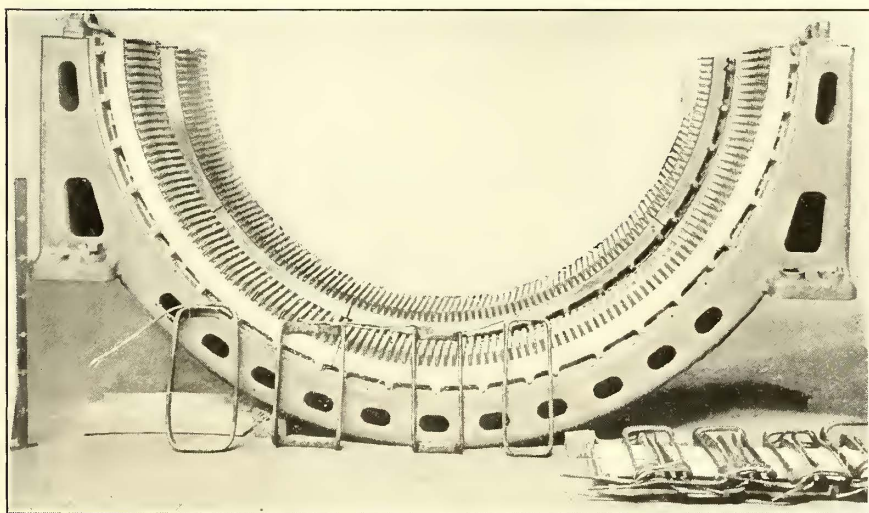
STATOR OF 3500-KW DIRECT-CONNECTED ALTERNATOR FOR METROPOLITAN STREET RAILWAY, NEW YORK
